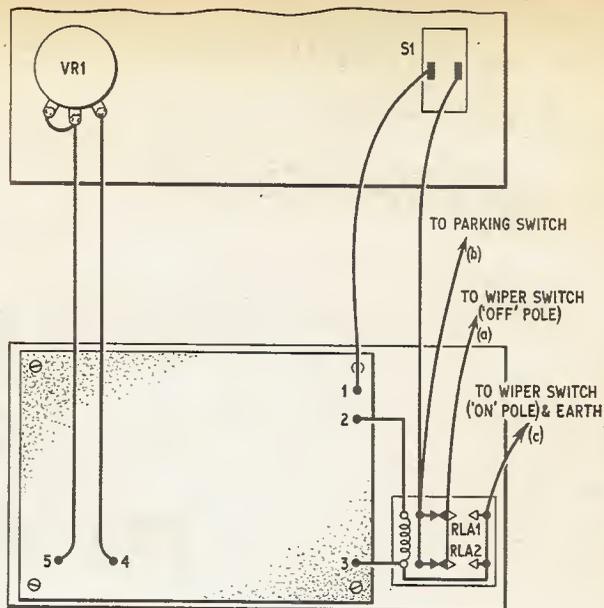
Layout and wiring of the components mounted in the diecast case; all interconnections should be made using plastic covered wire. S1 and VR1 are positioned to avoid contact with the relay and component board when the front of the case is screwed down
